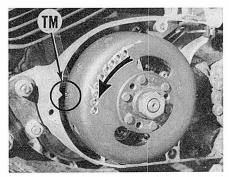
Ignition timing marks (TM) on crankcase and flywheel are shown. Ignition timing can be retarded 2 degrees, but should not occur before crankcase mark and flywheel mark are aligned.
